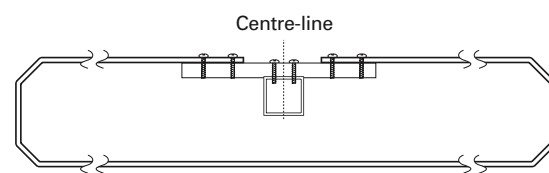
How the driven element attaches to the boom, but is insulated from it.
